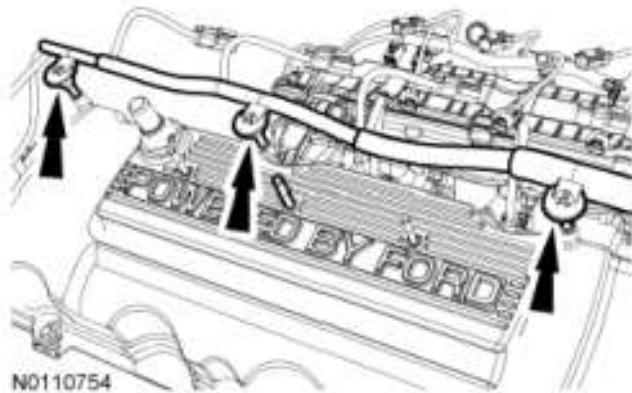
Locating LH And RH Camshaft Position Electrical Connectors
